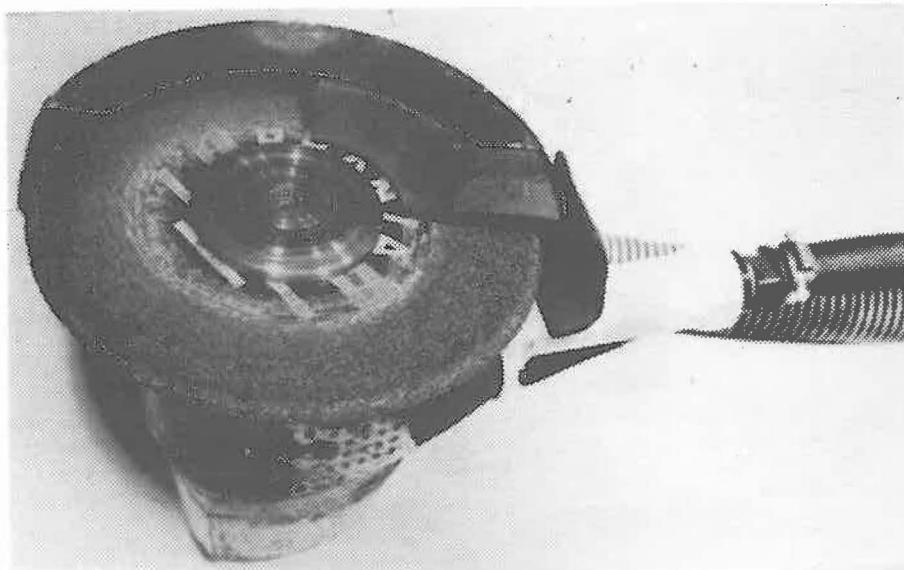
A cutting wheel equipped with an exhaust hood inside the shield.
